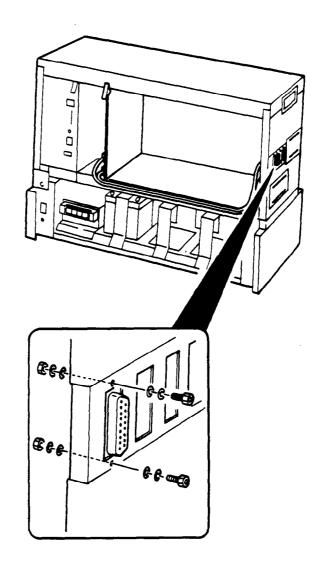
Connecting the MIF Cable Assembly and the MIF-F(A)-10 KTU to the ESF-XB-10 KSU
